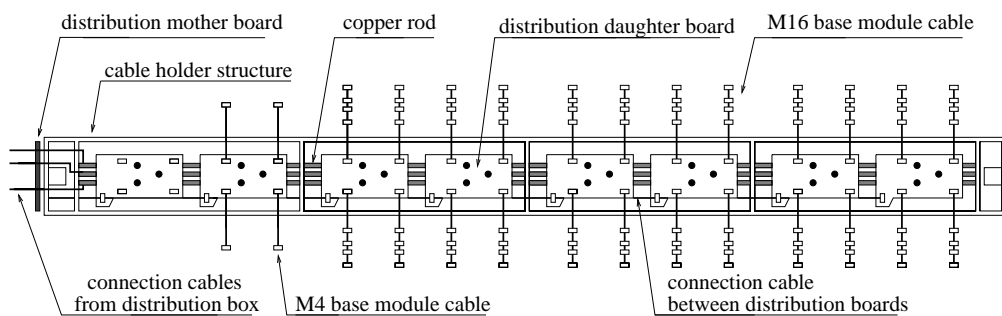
Schematic view of the cable holder bottom side. Distribution daughter boards fixed on the copper rods with M4 and M16 base module cables and distribution mother board mounted at the end of the cable holder are presented.
